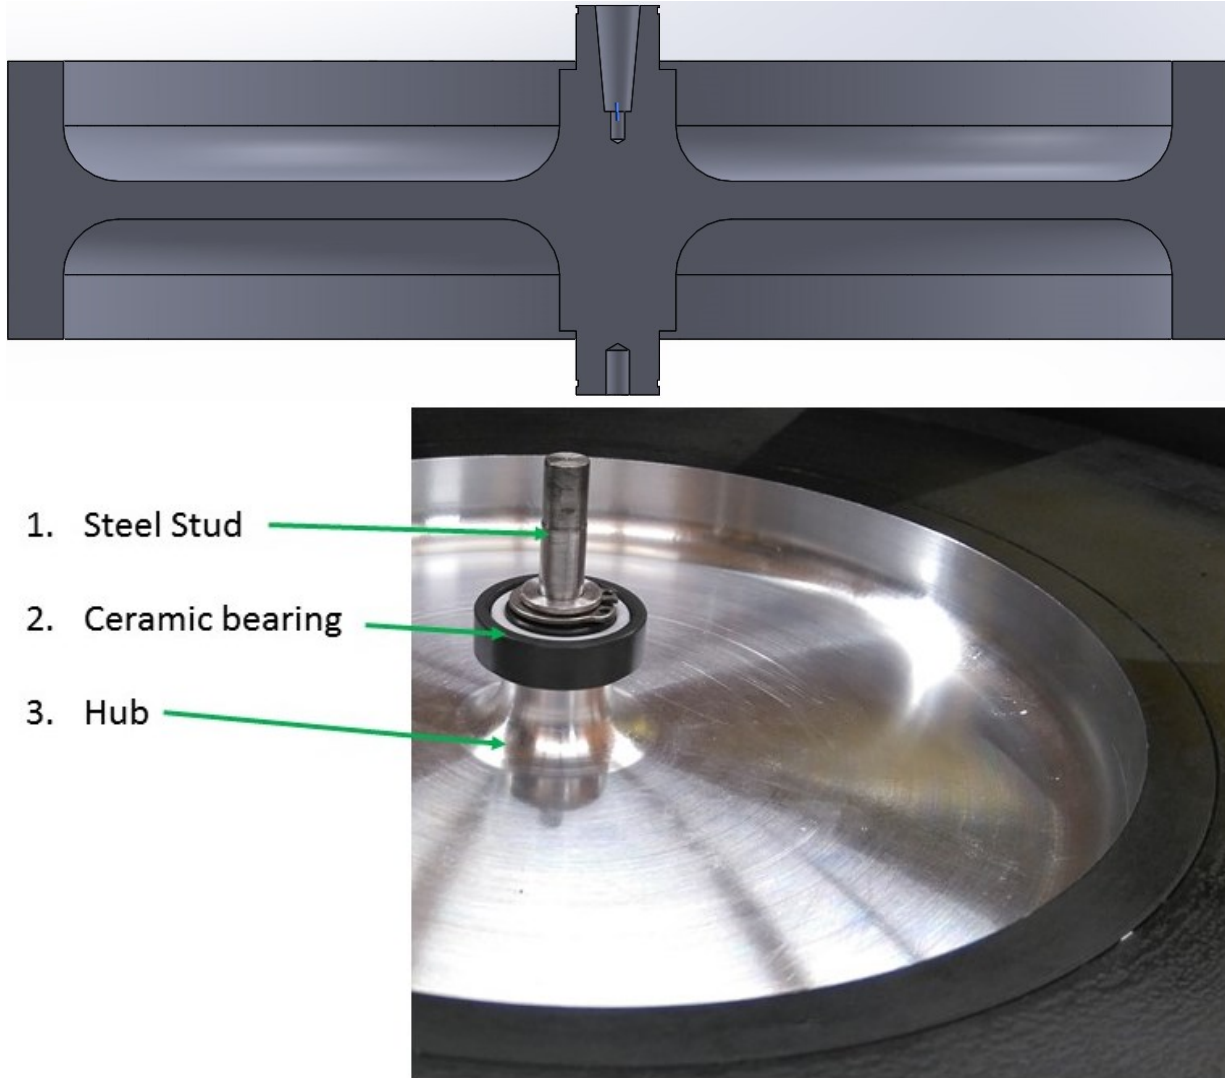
a) Solid model of the hub redesign. b) As manufactured and assembled.
